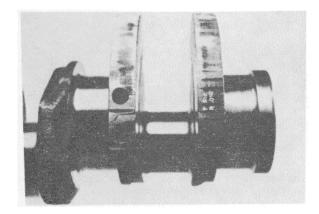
C-18. Oversize Thrust Bearing Mark on the Crankshaft
